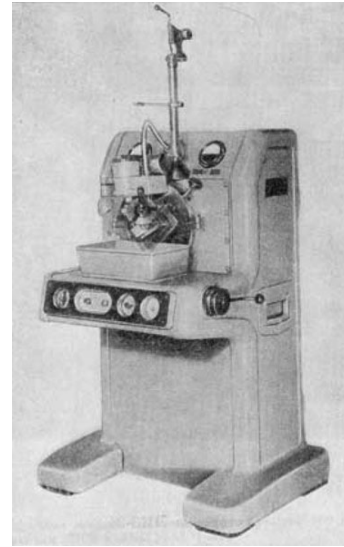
Drilling holes with a diameter of  $\varnothing 0.15$  mm in sprayers of pump–injector units by a high-speed drilling machine with a pneumatic drive.
